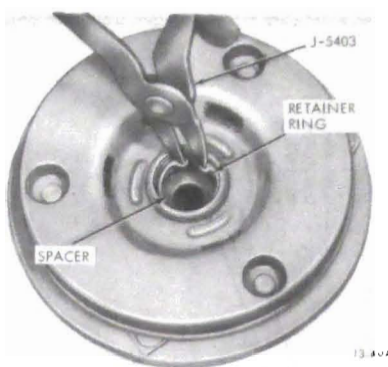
Removing or Installing Retainer Ring in Clutch Drive Plate
